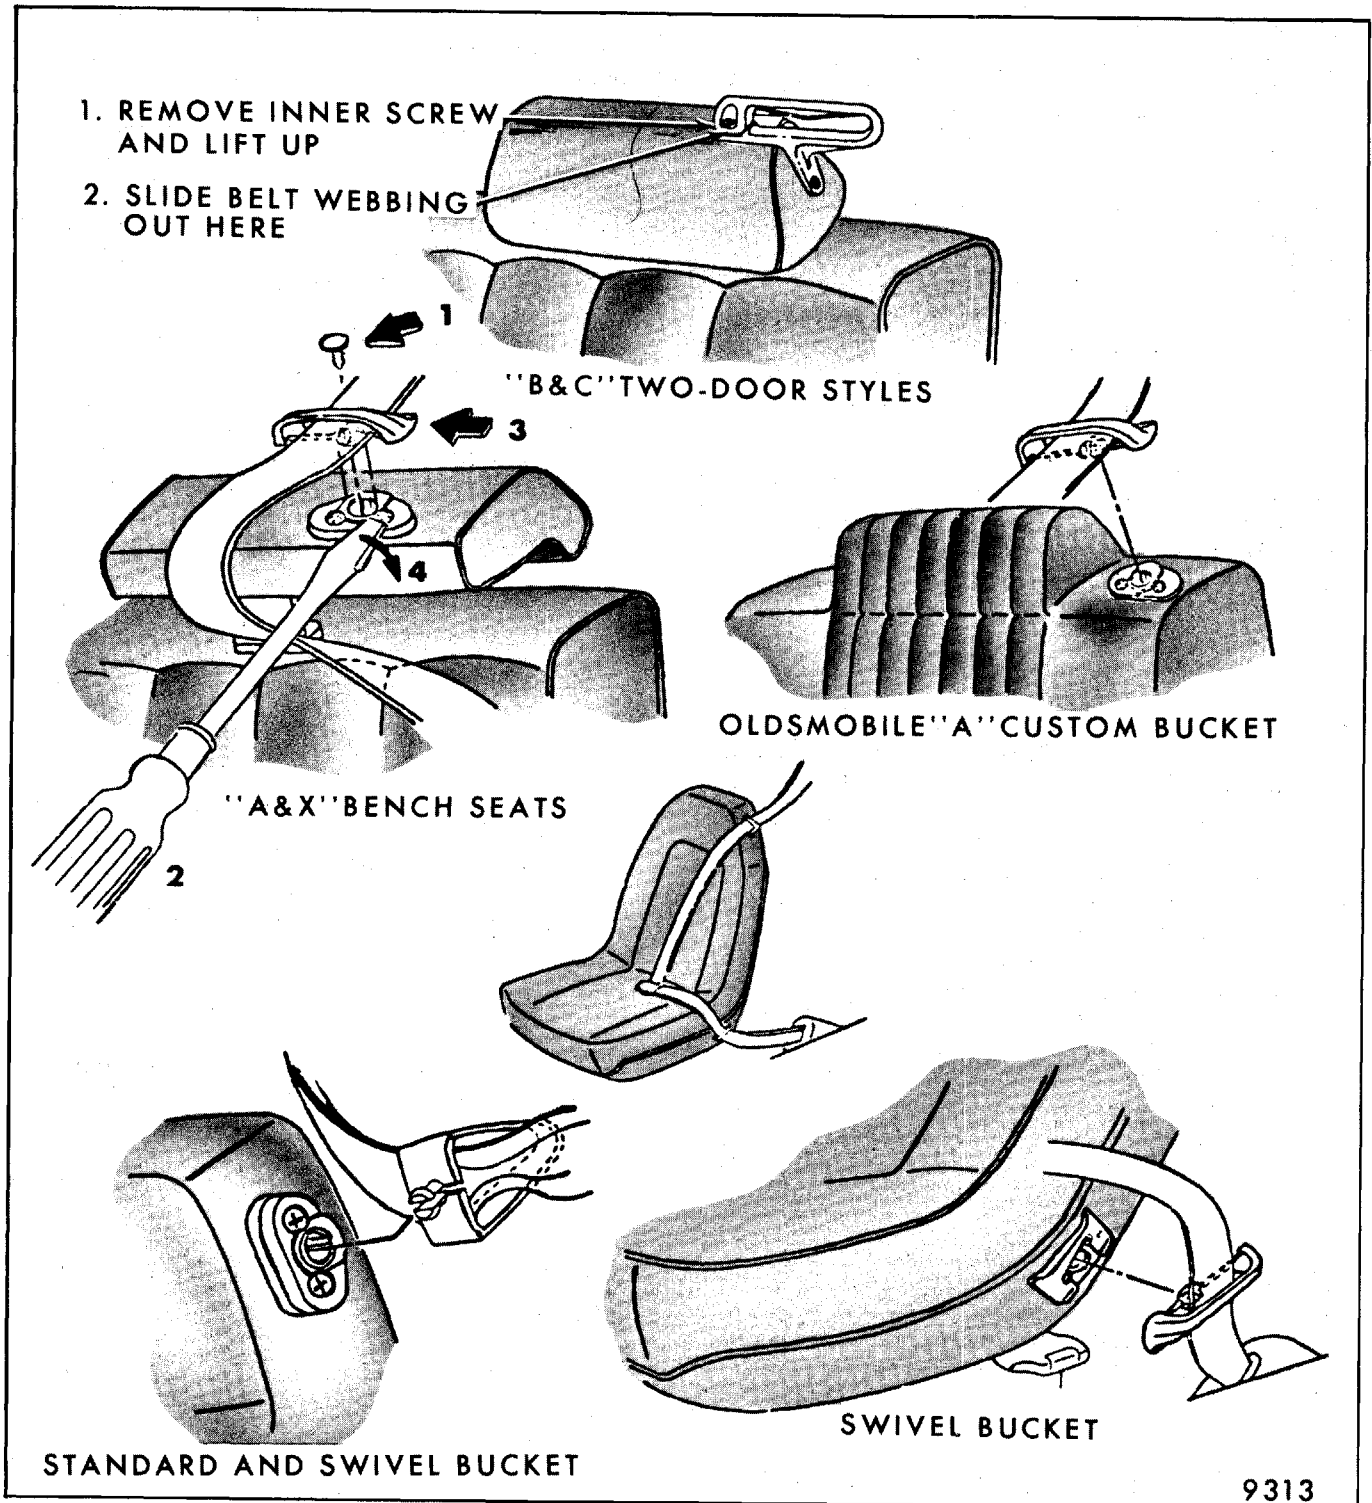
Shoulder Belt Guide Loop - Removal
